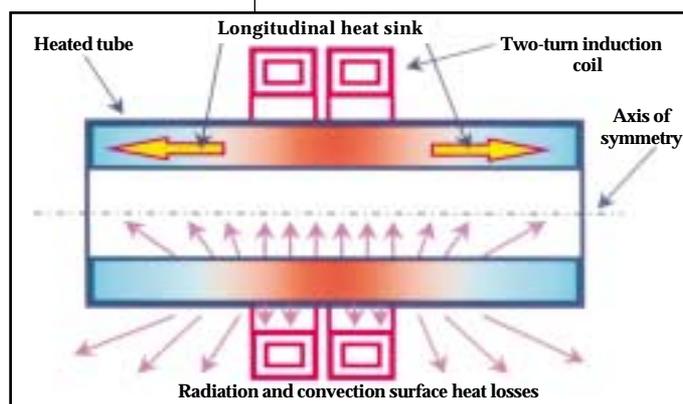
Radiation and convection surface heat losses in selective heating of tubes. Cooling from the OD surface is more pronounced. (Ref. 1)
